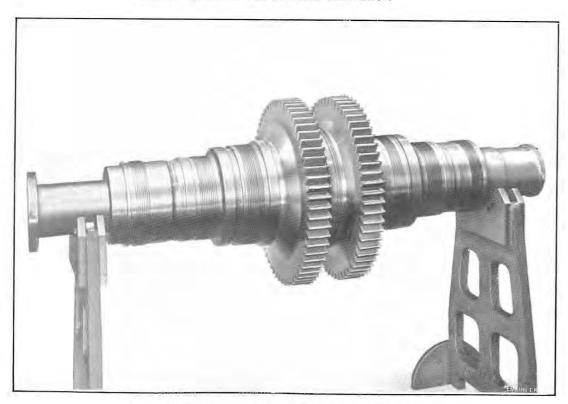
Rotor of High-Pressure Turbine before Blading.
